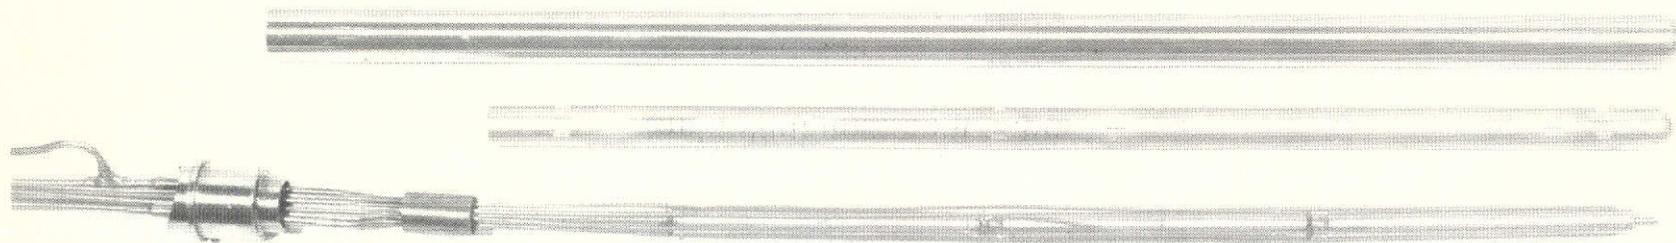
Thermocouple subassembly of capsule UN-6 ready for thermocouple calibration run.
